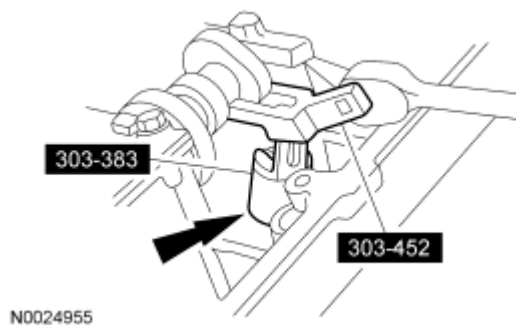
Installing New Valve Seal Using Special Tools (303-383) & (303-452)
